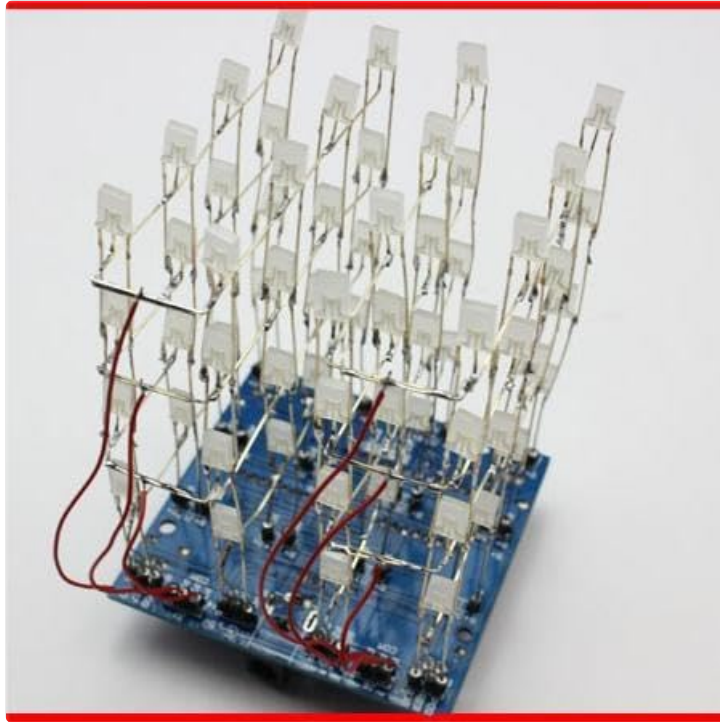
A detailed view of the circuit board for the 3D LED Light Cube, highlighting the soldered connections and red wiring.
